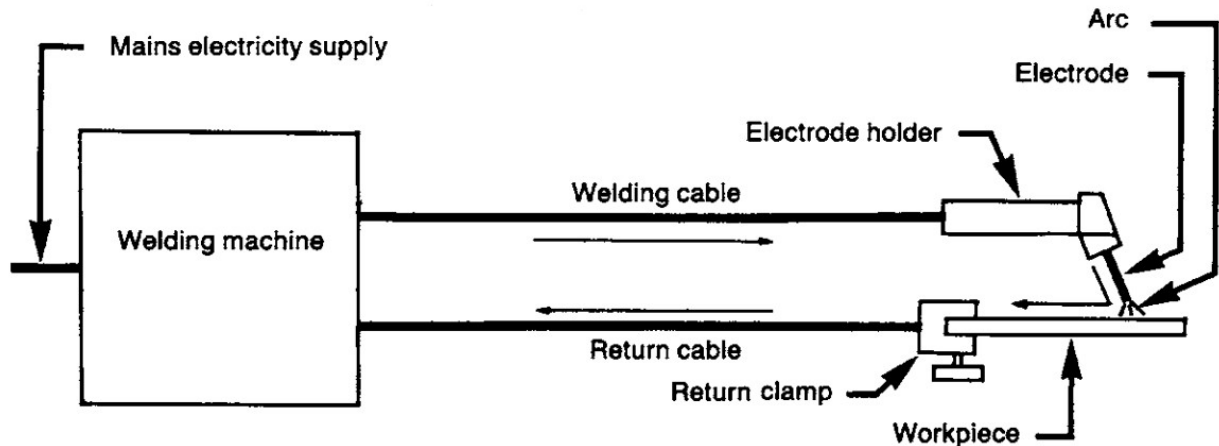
The Arc Welding Circuit (Vural, 2014).
